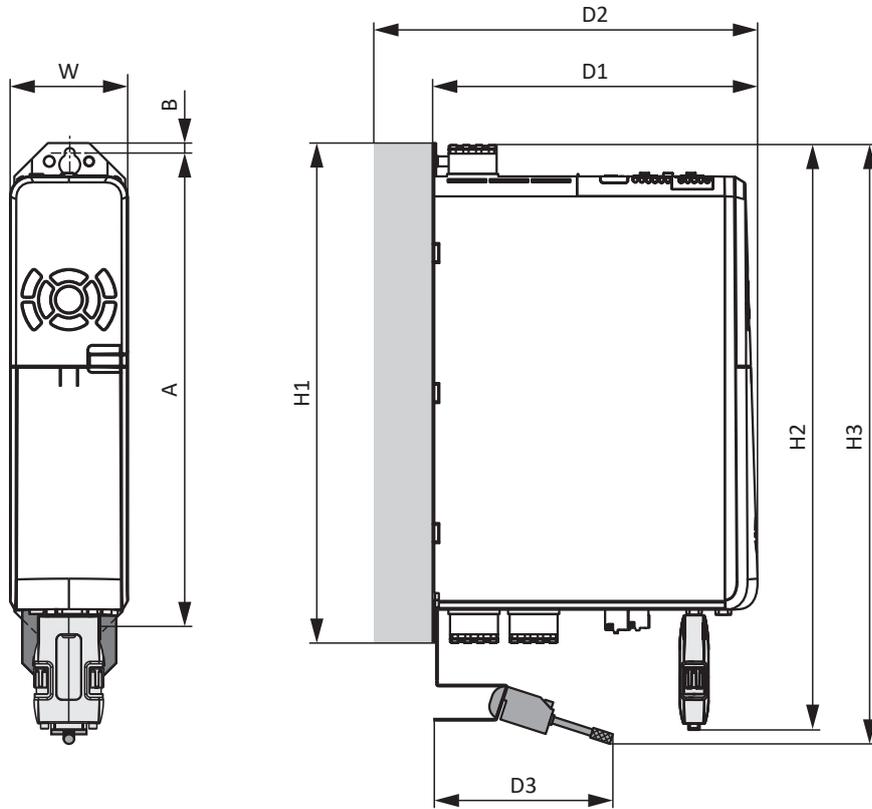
SD6 dimensional drawing, sizes 0 to 2
